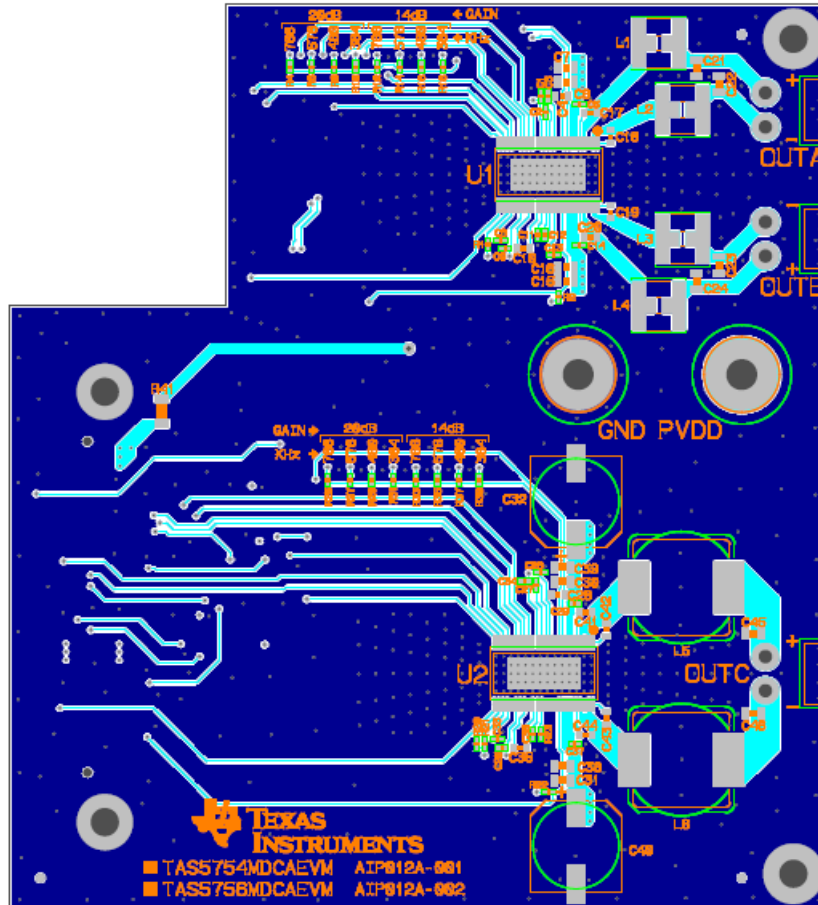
TAS5754/6MDCAEVM Top Composite Assembly
